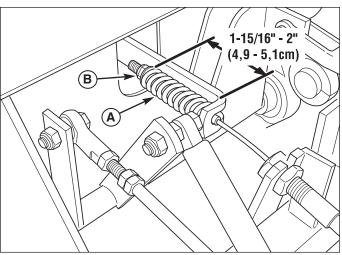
Parking Brake Adjustment A. Brake Spring B. Adjustment Nut
